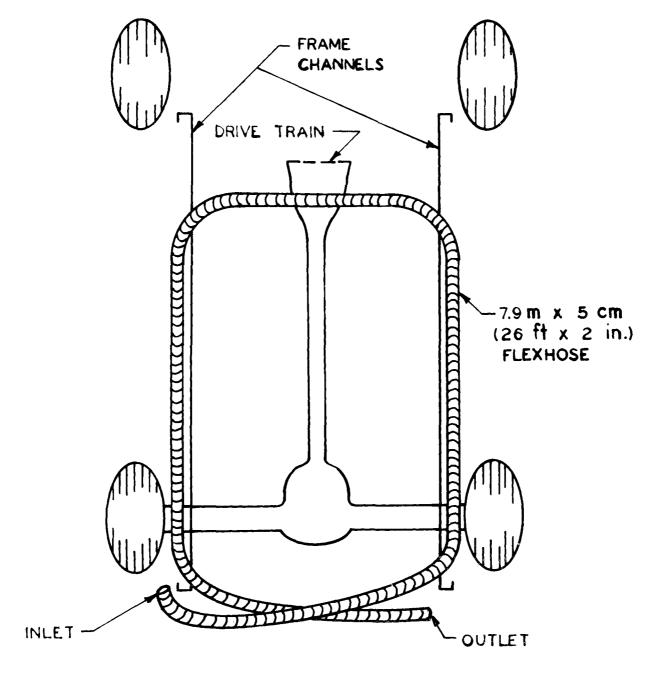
Exhaust dilutor ambient air heater on 1971 GMC Jimmy.
